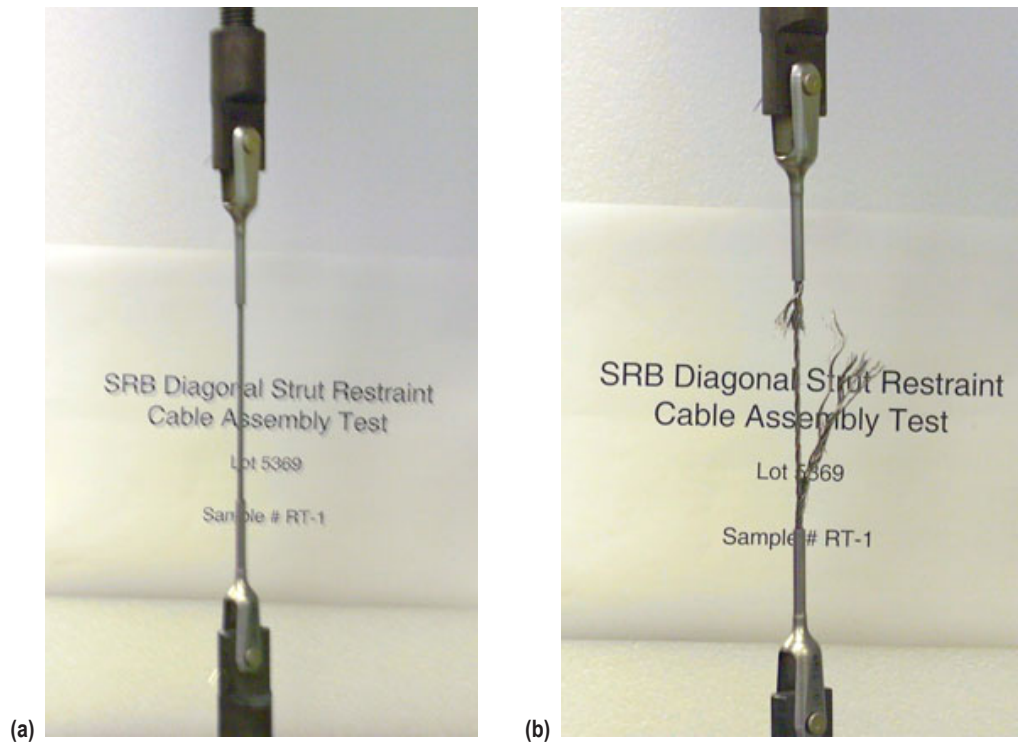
5369–RT–1 (a) before testing and (b) after testing.
